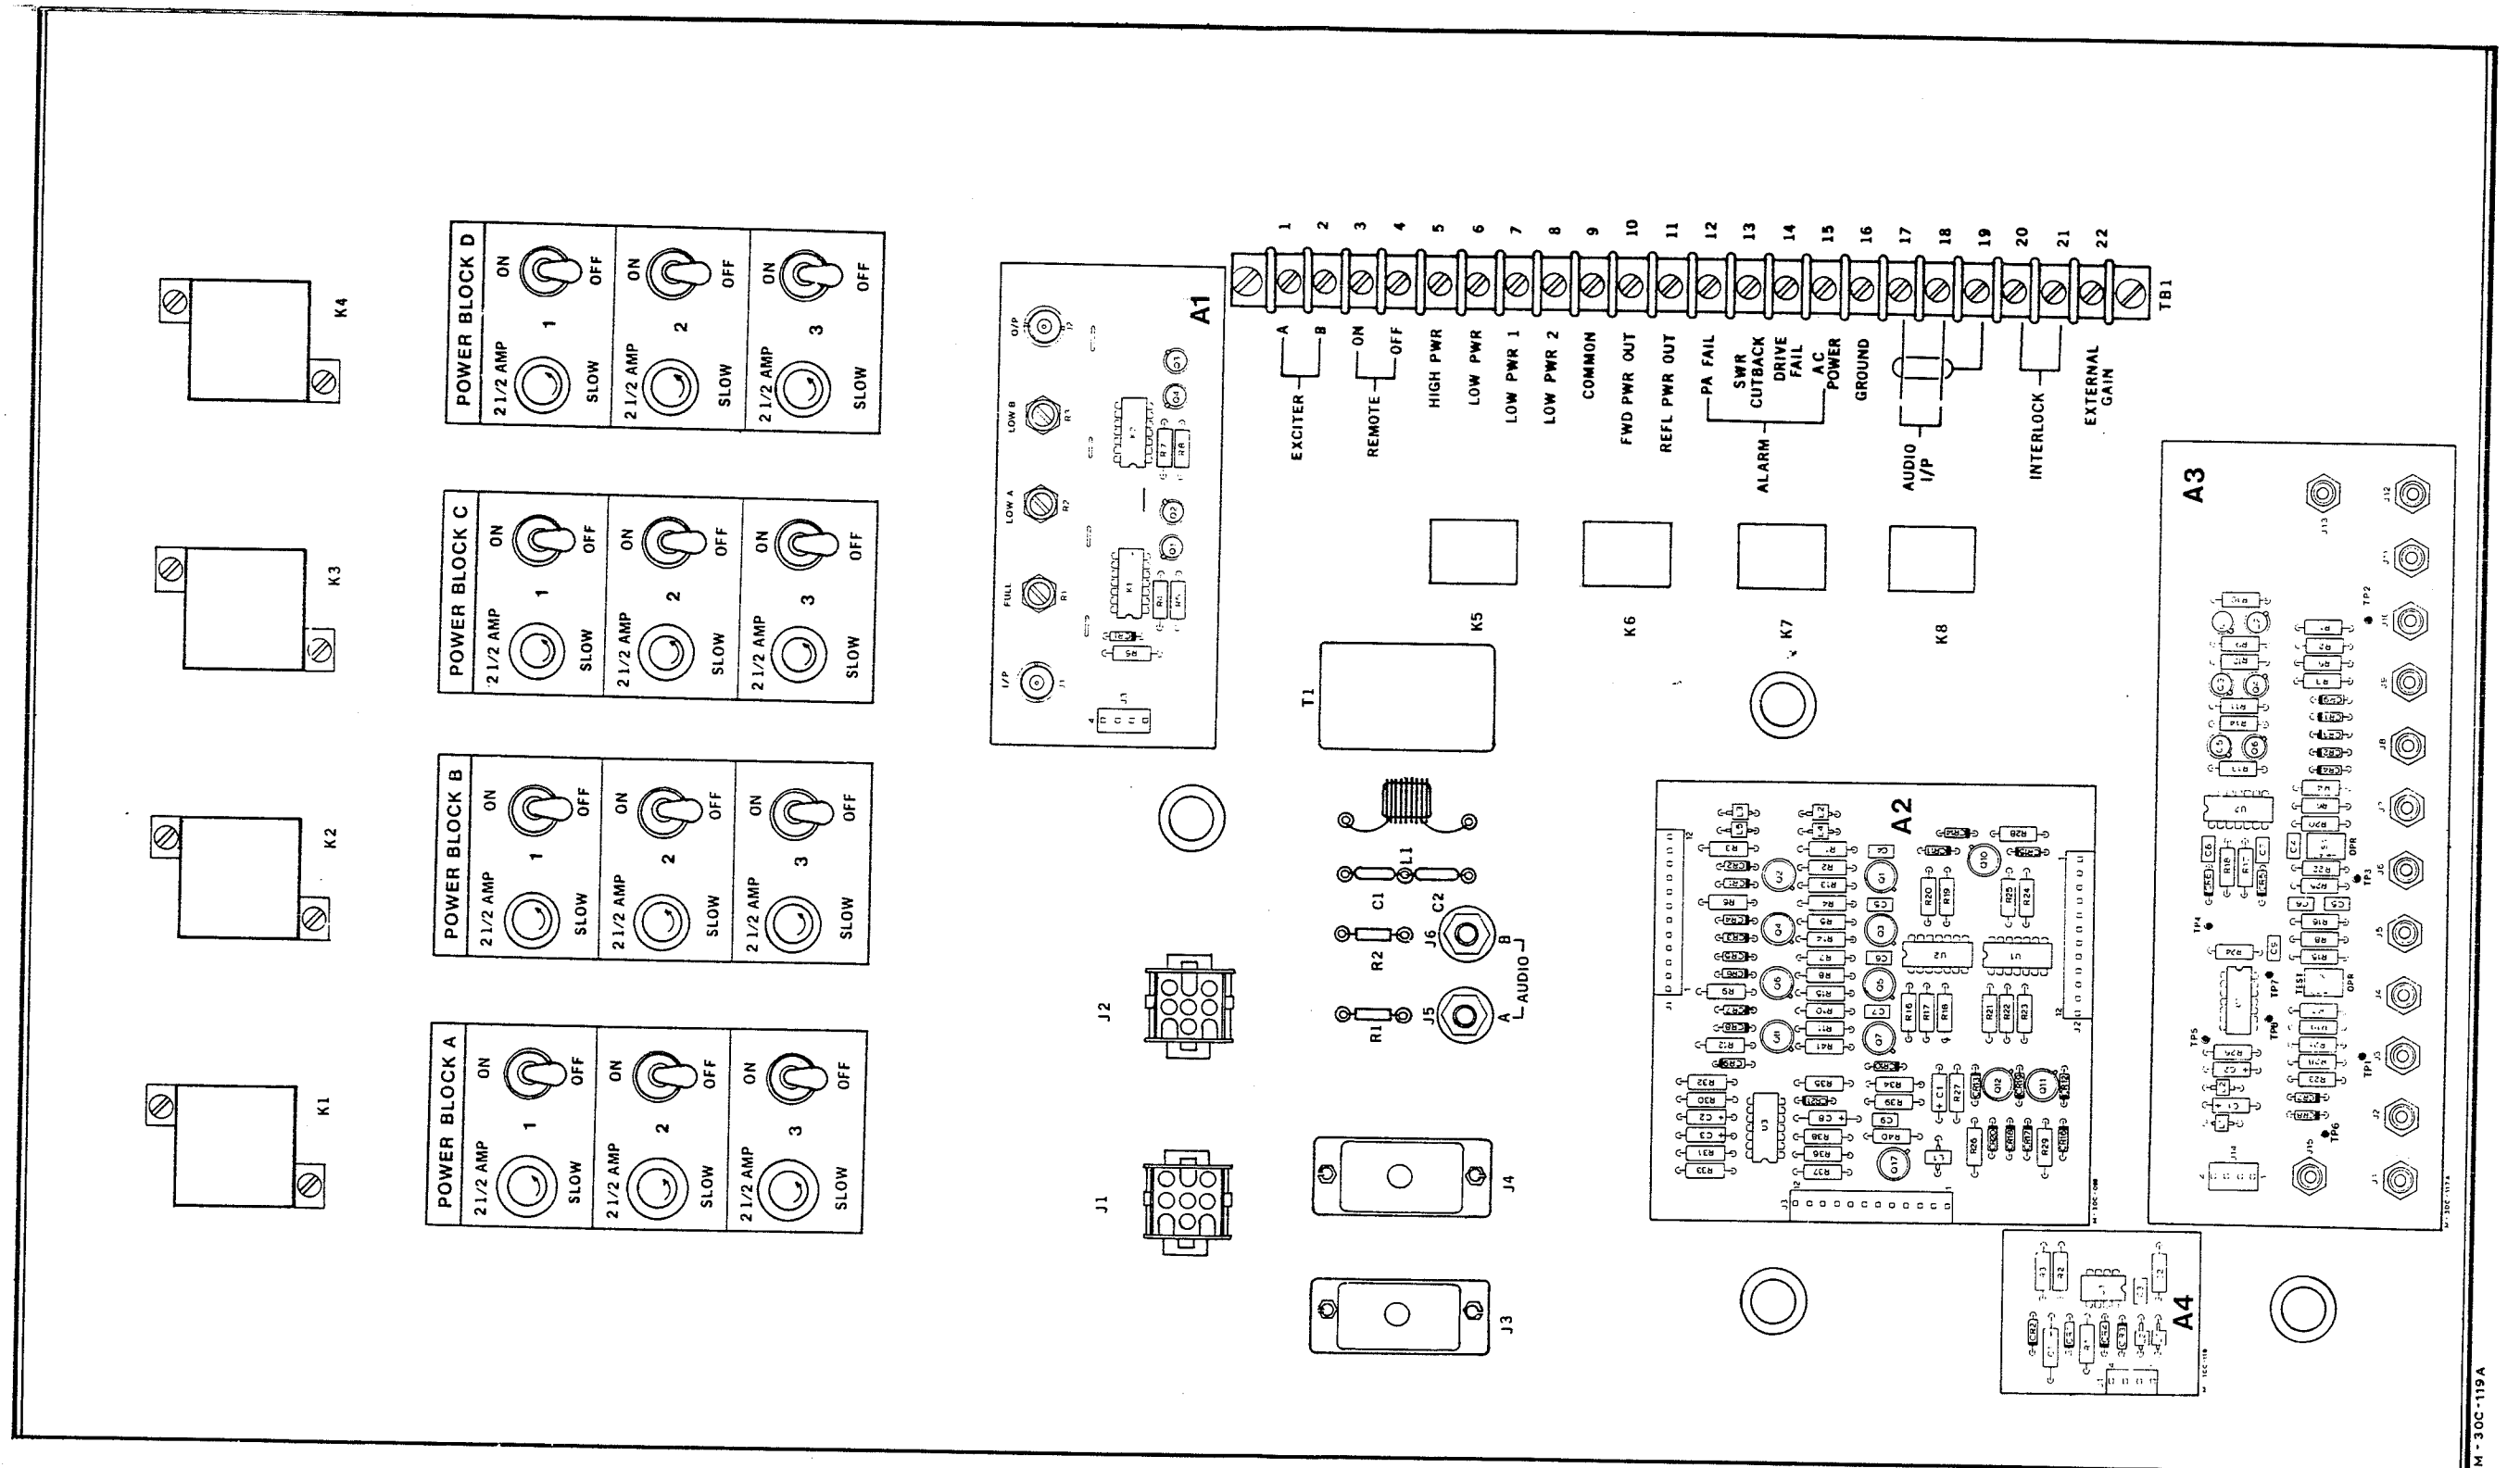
Assembly Detail - NAC29 Interface Panel (Front View)
